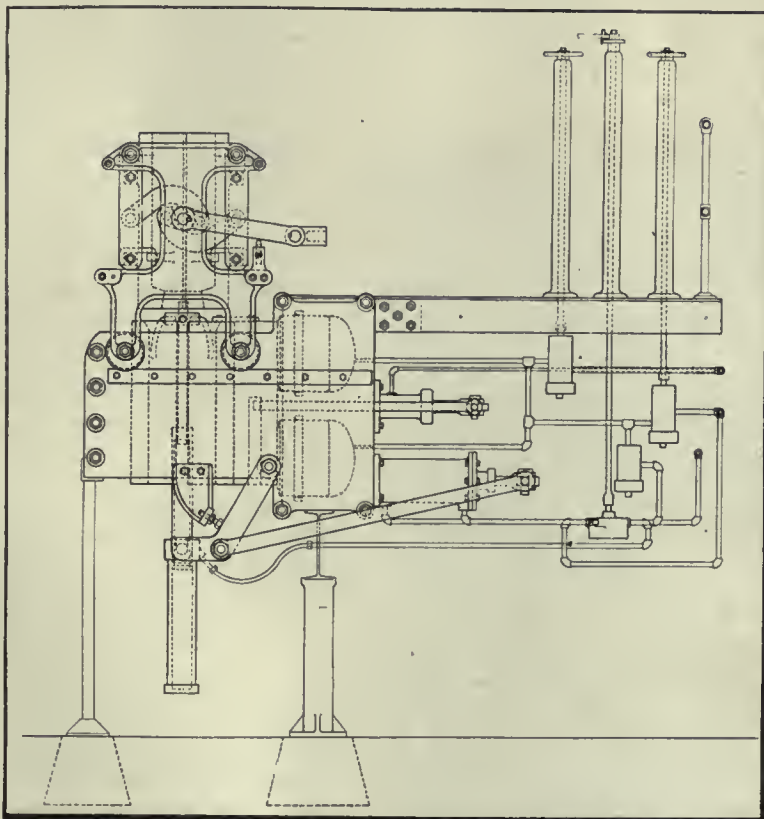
GENERAL ARRANGEMENT OF MACHINE FOR COMPRESSING STEEL INGOTS.
